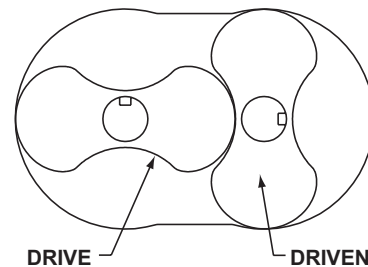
Correct Positioning of Rotor Keyways for Assembly
